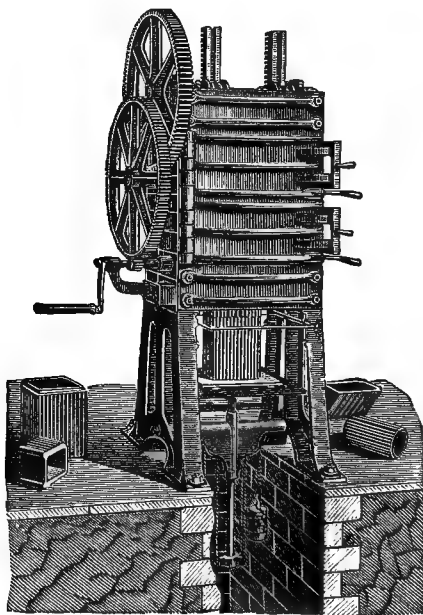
Boulet & Co.'s vertical flue-tile machine with charging doors.
